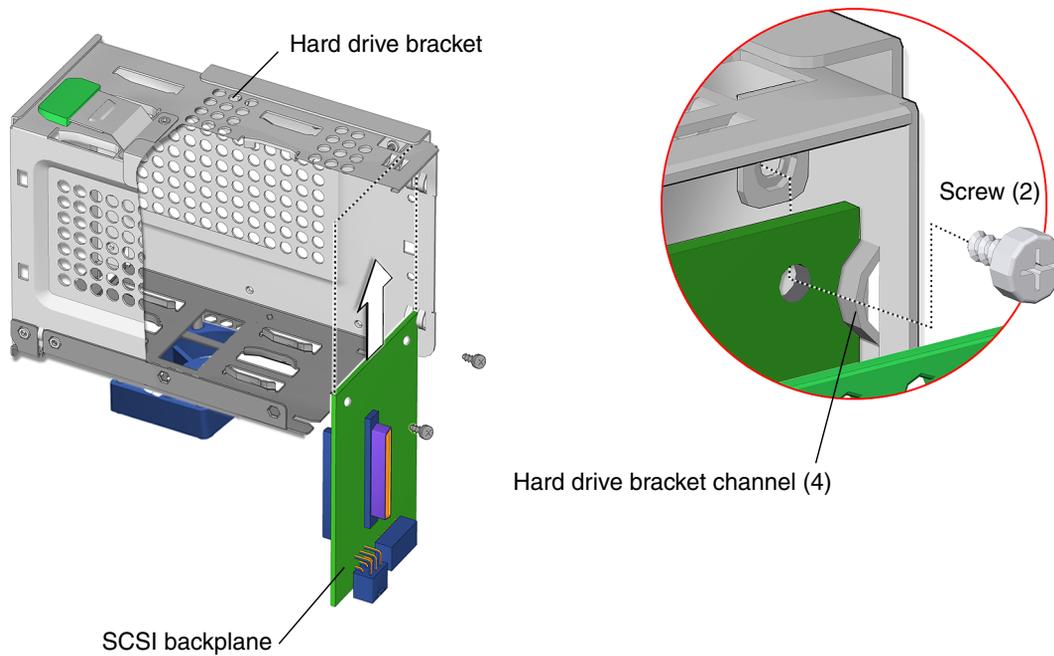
Aligning the SCSI Backplane to Hard Drive Bracket
